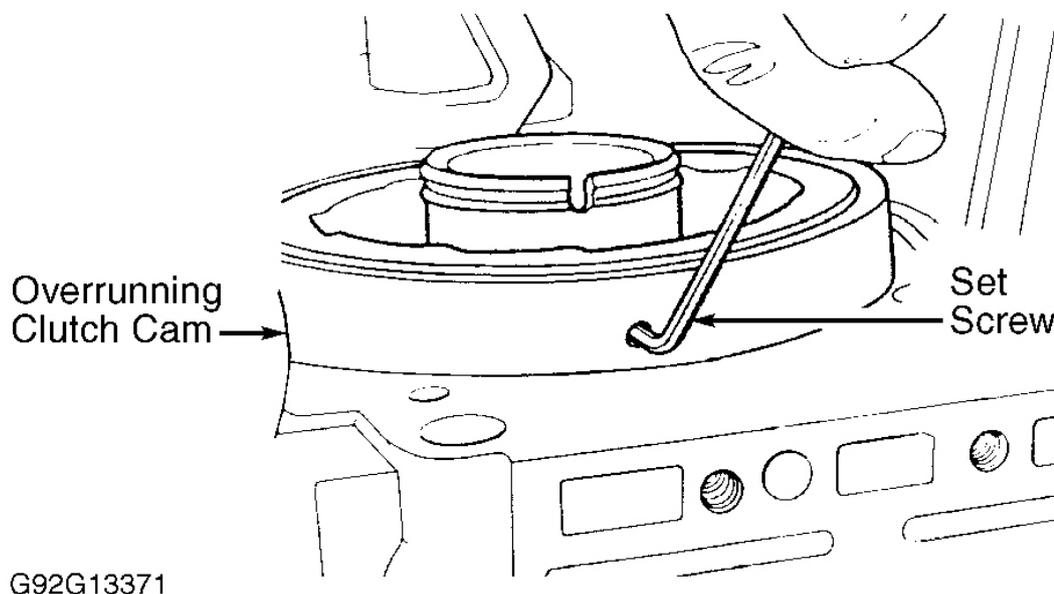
Removing & Installing Set Screw For Overrunning Clutch Cam
